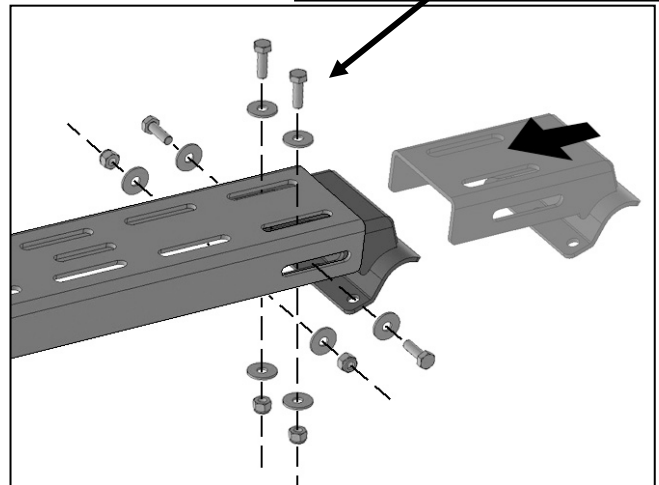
Attach passenger/right Rear Rack End with Logo to Side Tubes
